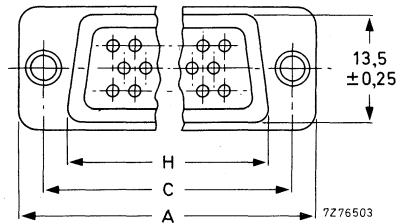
Terminal side of pin (or socket) connector; see also Table 2.
